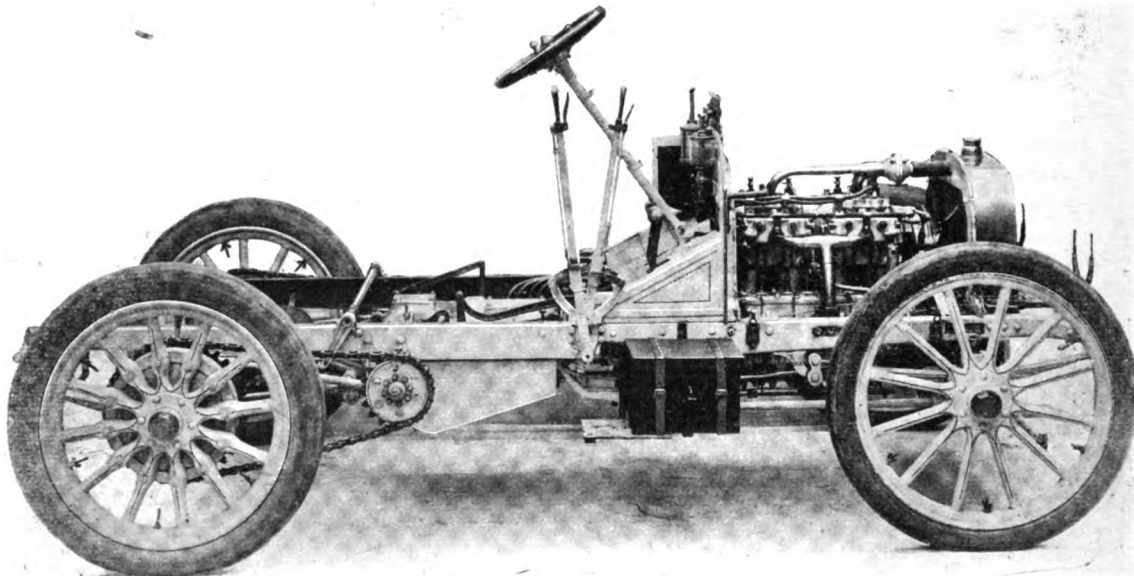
The Chassis of the Leon-Bollée 24—28-h.p. Ca
